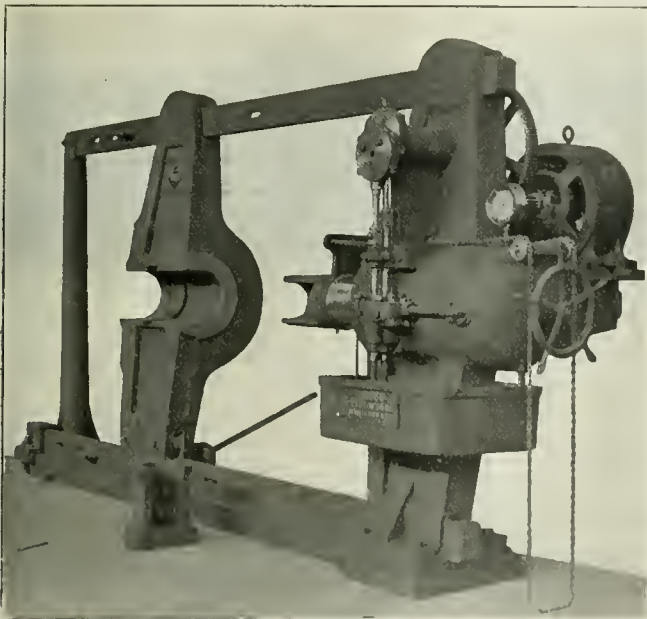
Niles-Bement-Pond 300-Ton Hydraulic Wheel Press.
